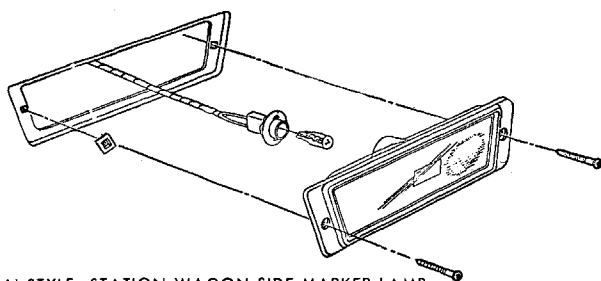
Exterior Lamp Installation - Buick Styles
